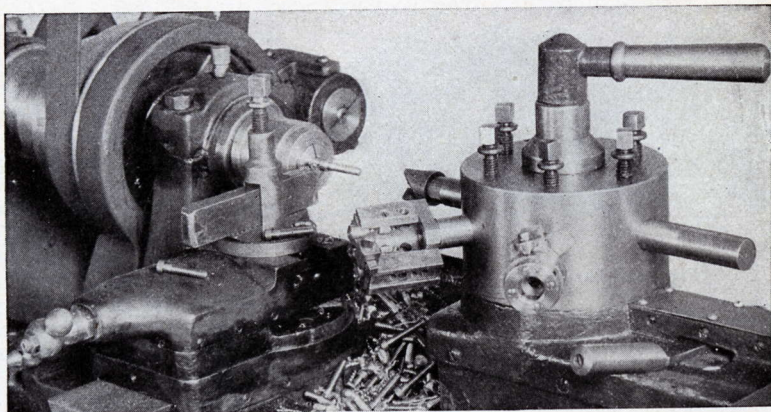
A screw cutting lathe fitted with Draw-in Collet Chuck Attachment and hand lever turret, for making small screws. Note the box tool and the threading die.
